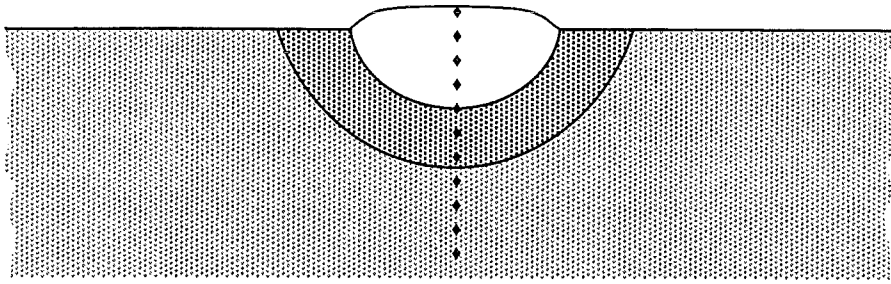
Hardness measurements on the cross-section of a weld.
